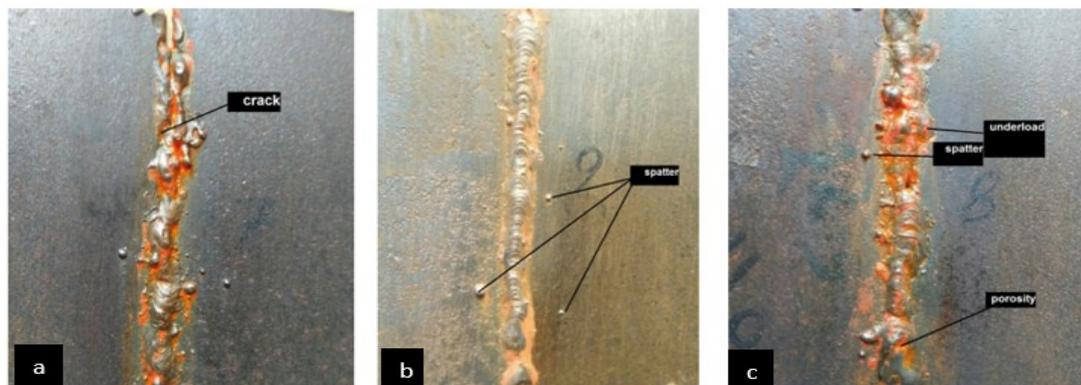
Welding defects at (a) A=260, S=112 (b) A=260, S=118 (c) A=260, S=123.
